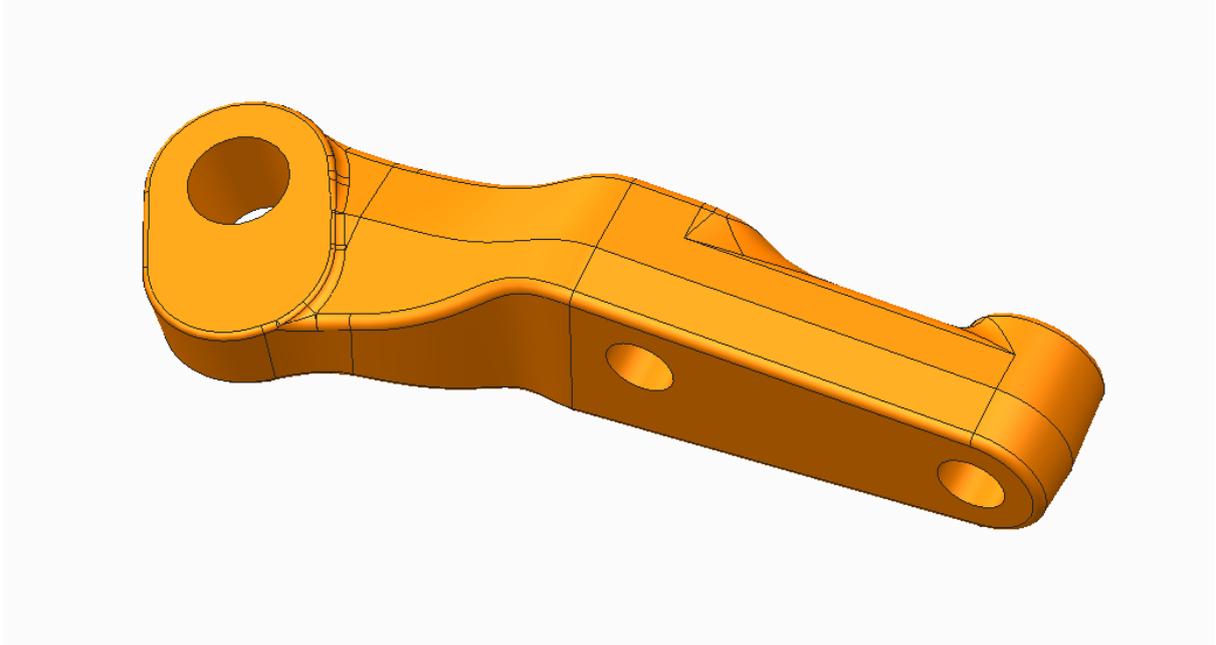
Standard Volvo tie rod arm, from a tag axle assembly with fixed steering knuckles.
